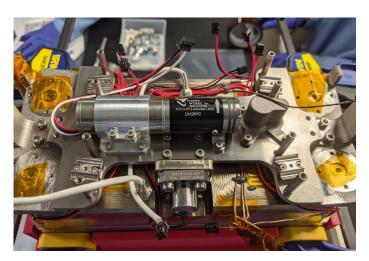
Tank and Manifold Subassembly with the Pump Attached
